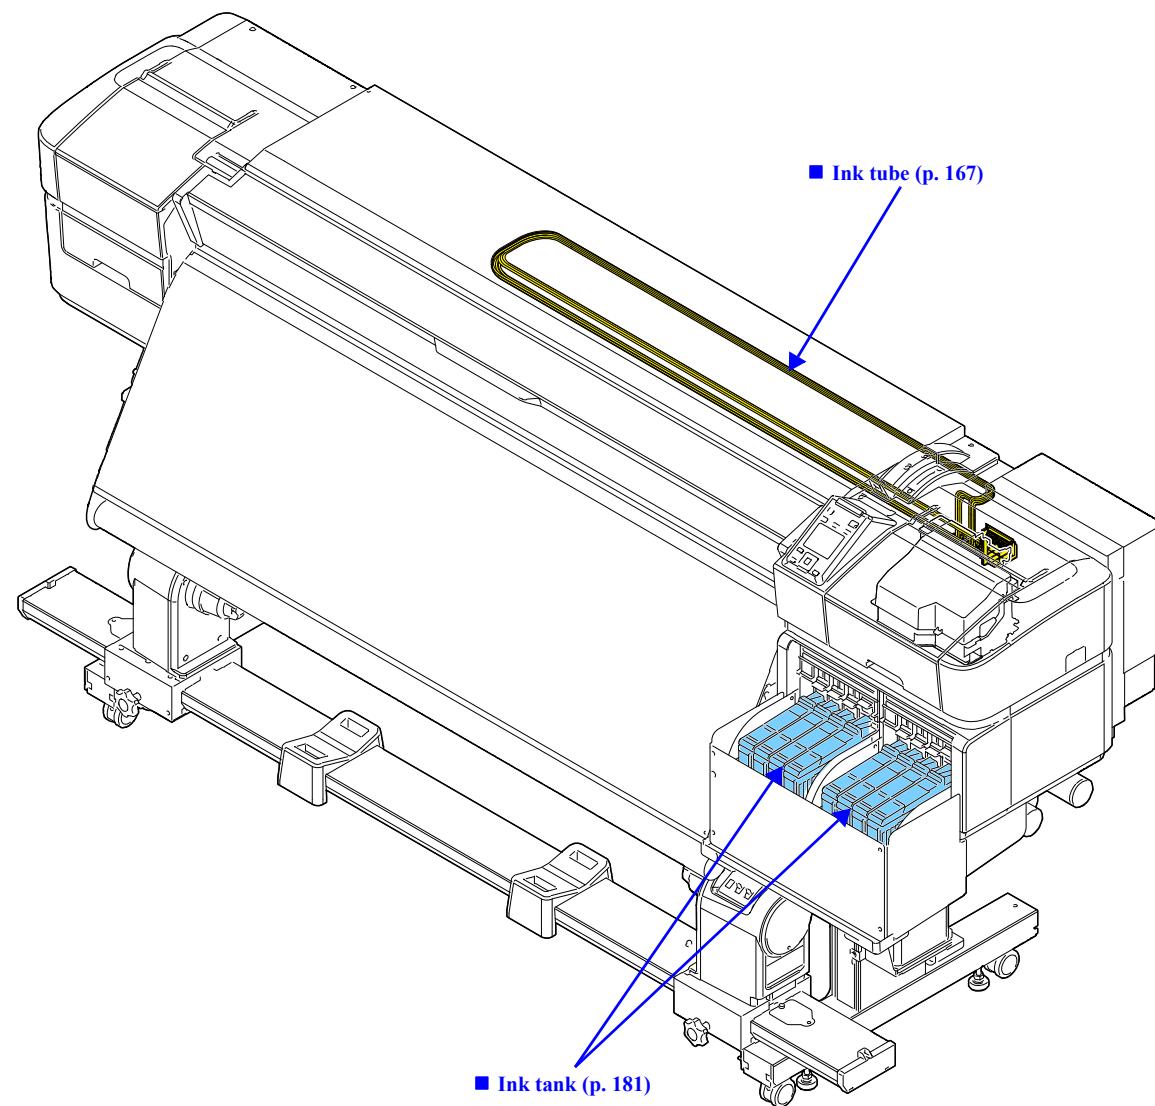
Carriage Mechanism/Ink System Mechanism
